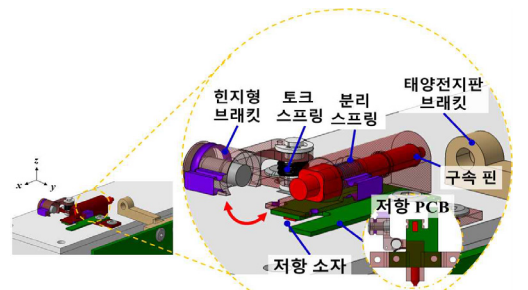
Schematic Views of the Pin-puller Type Holding and Release Mechanism
